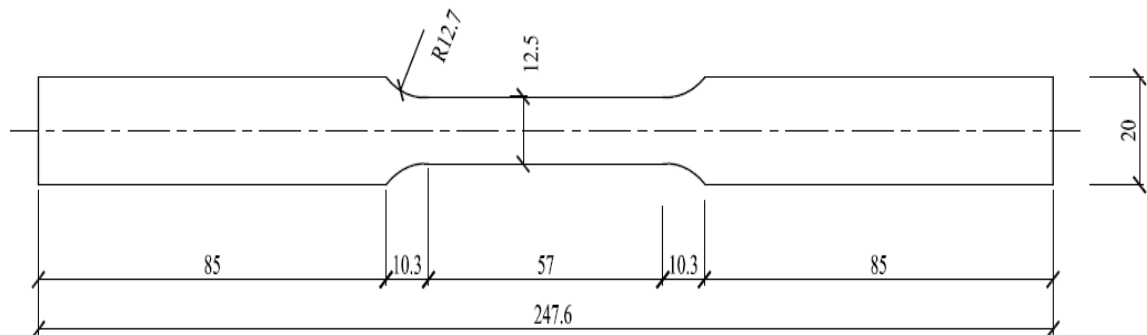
Dimensions of profiled steel sheet tensile coupon test specimen
